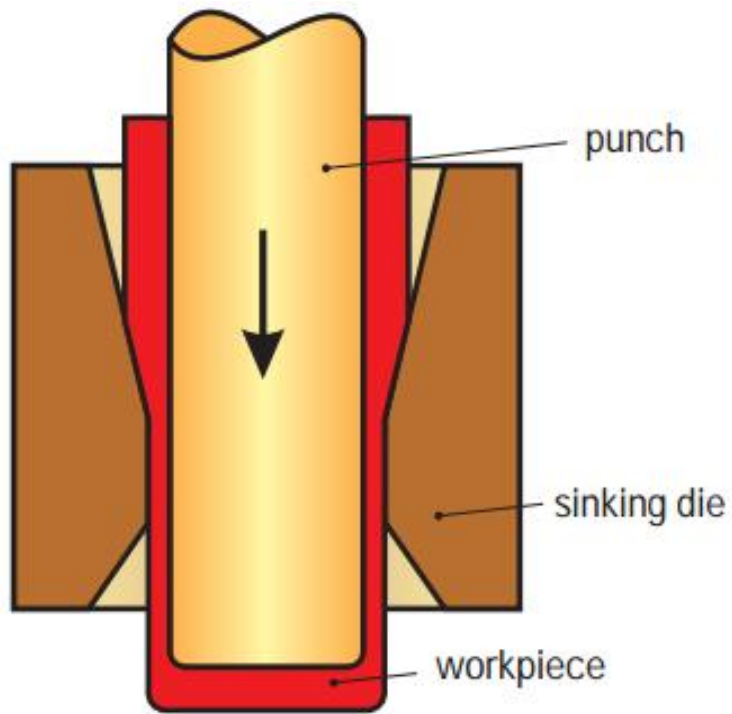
The metal-forming processes involved in manufacturing a two piece aluminum beverage can manufacturing a two - piece aluminum beverage can .
